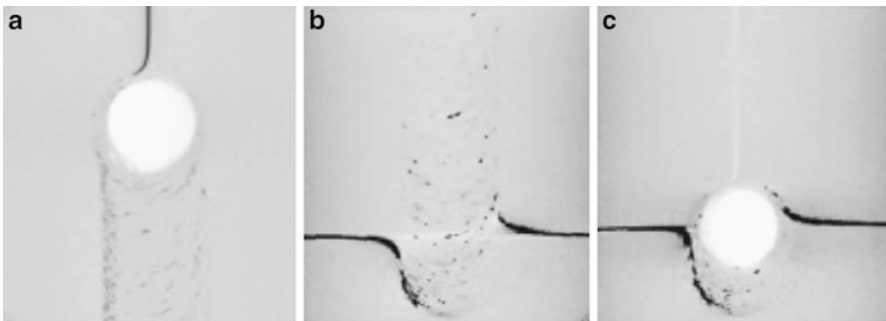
Displacement of marker during friction stir welding (Schmidt et al. 2006, reprinted with permission from Elsevier)
